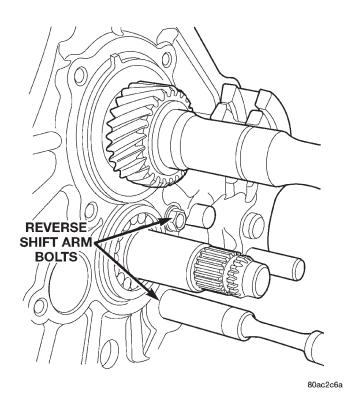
Remove Reverse Shift Arm Bracket Bolts
